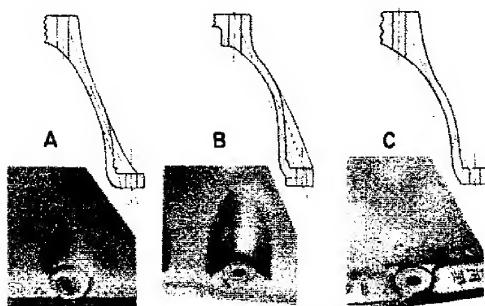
METHOD OF FLANGE DESIGN FOR ALUMINUM CASTING JOINTS. DESIGN 'A' HAS ABOUT 50% MORE LOAD CARRYING ABILITY THAN DESIGNS 'B' AND 'C'. IN ADDITION DESIGN 'A' IS EASIER TO CAST AND MACHINE.
